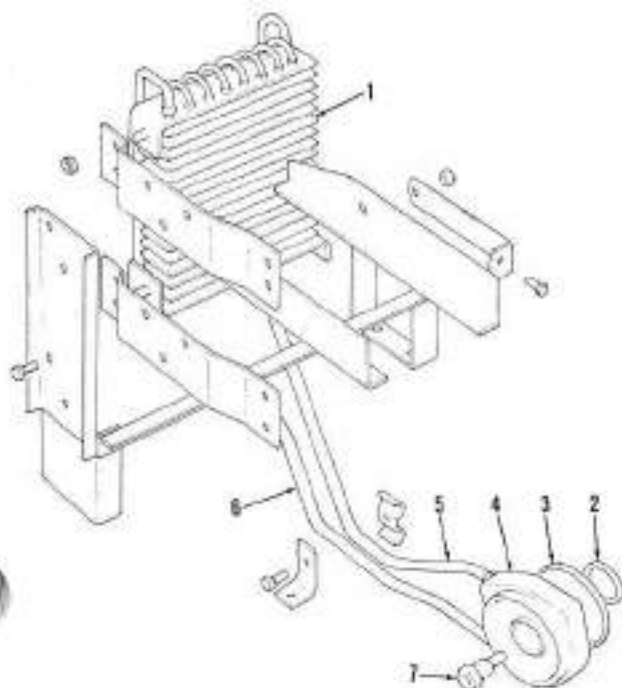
B—View showing engine oil cooler and mounting bracket arrangement used on 1410 and 1412 tractors with tandem hydraulic pump.
